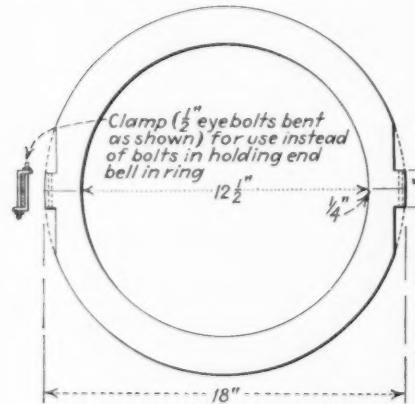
Clamping ring used in jig for holding HM-822 motor end plate
